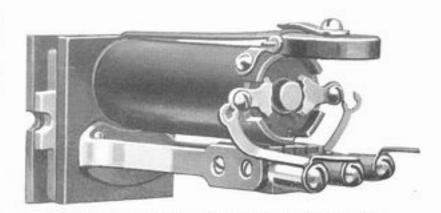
REAR VIEW WITH ARMATURE RAISED
